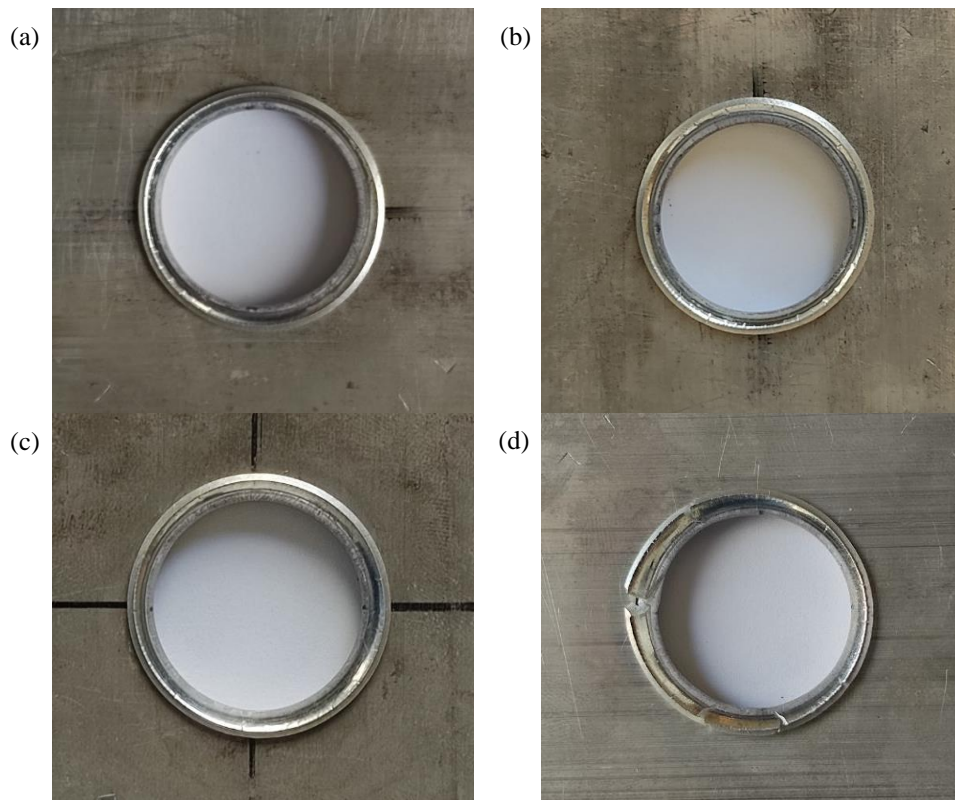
Joints for the single lap shear tests: (a) joint 1, (b) joint 2, (c) joint 3 and (d) joint 4.
